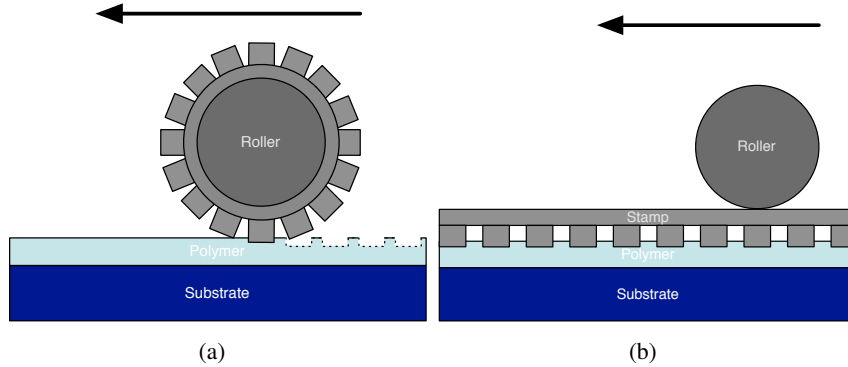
Imprinting in roll-to-roll line with (a) a cylinder stamp and (b) a flat stamp.
